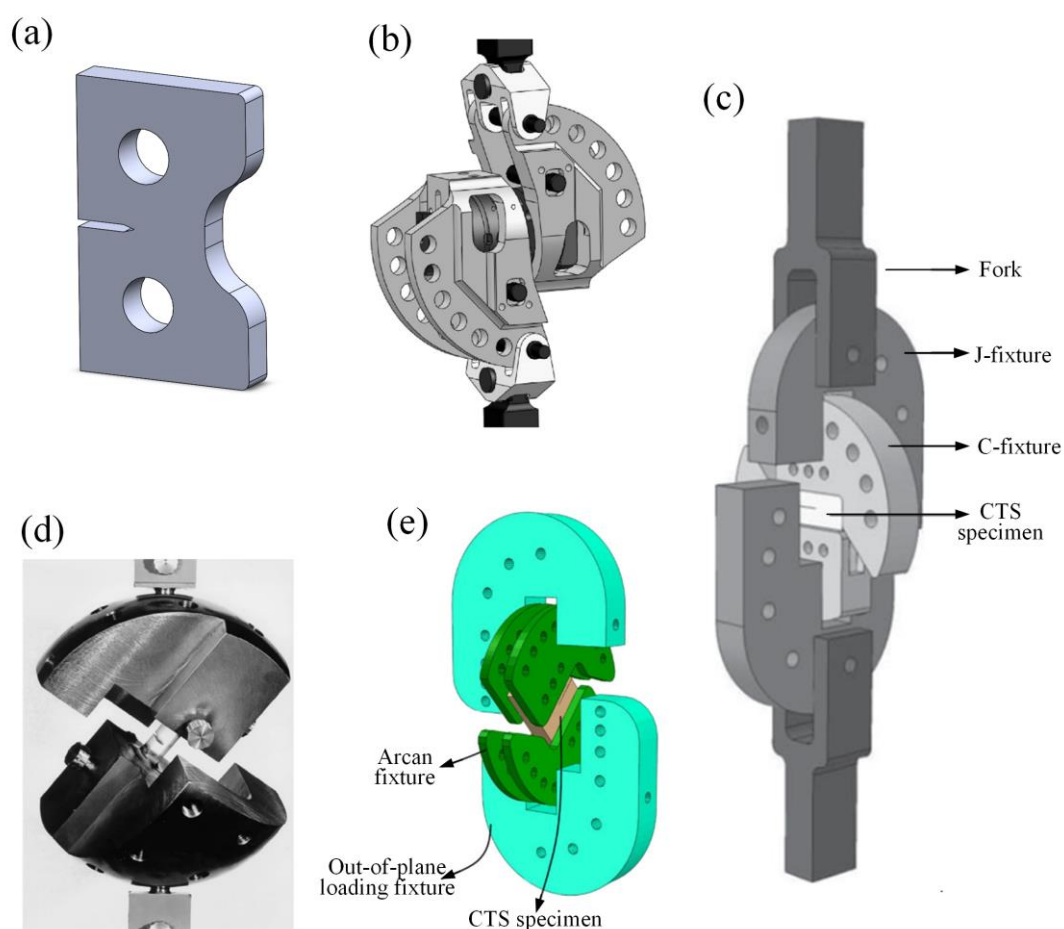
Various mixed mode (I/II/III) specimens and loading fixtures. (a) CTSR specimen. (b) Loading device for CTSR specimen [19]. (c) Loading setup using CTS specimen, J-fixture, and C-fixture [33] (d) Loading device for AFM specimen [19]. (e) Loading setup using J-fixture, Arcan fixture, and CTS specimen [32].
